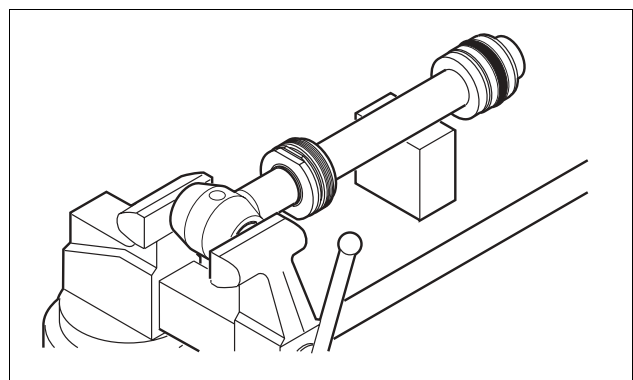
Fasten the piston rod assembly in a vise and place a support under the piston rod
